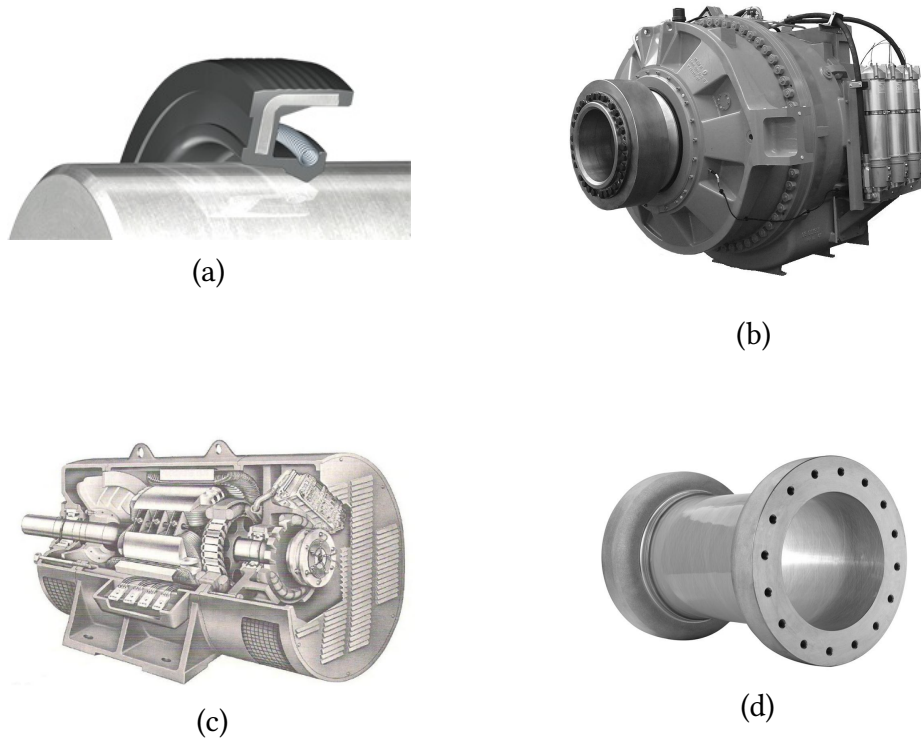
Examples of critical components that may be used in TST drivetrains showing a radial shaft face seal (a), a large-scale 500kW TST gearbox (b), cut-away of a typical wind turbine synchronous generator (c) and a wind turbine shaft coupling (d). Images reproduced from:
